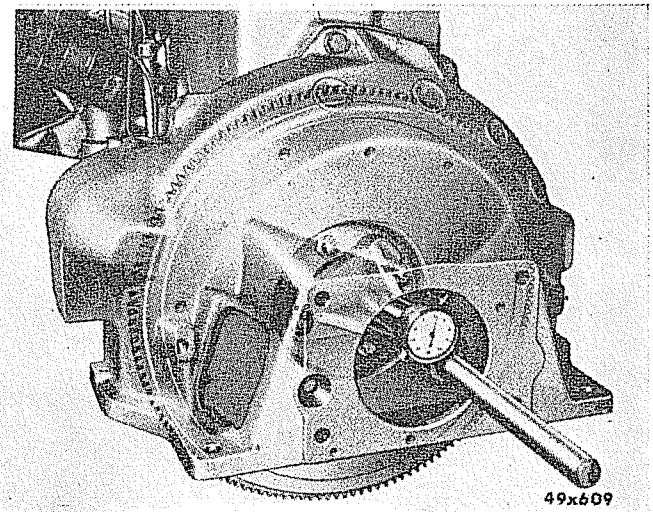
Method of Attaching Fixture C-870 (Flywheel Type Housing)
